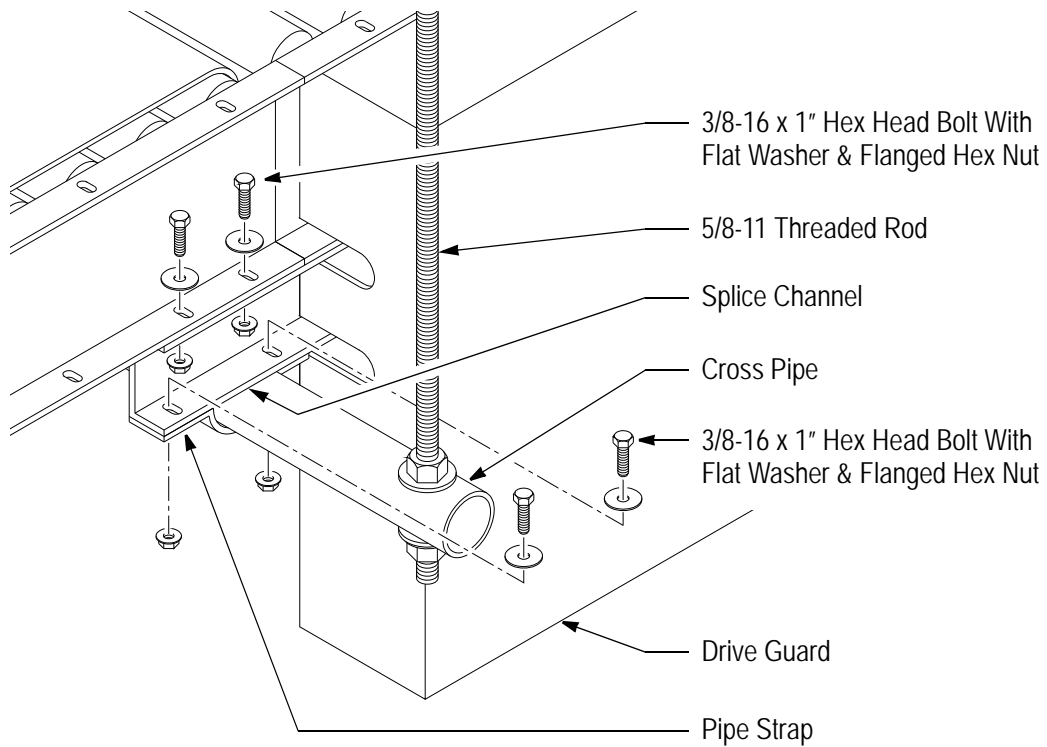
Installing a Ceiling Hanger Offset from a Section Joint
